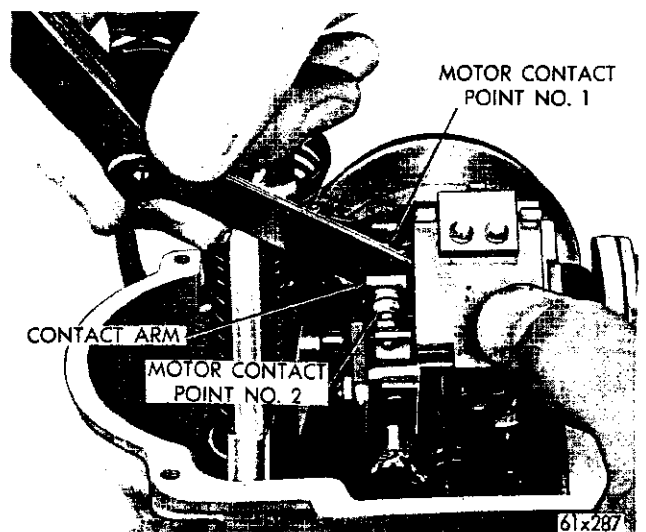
Measuring Contact No. 1 and Contact Arm Clearance
